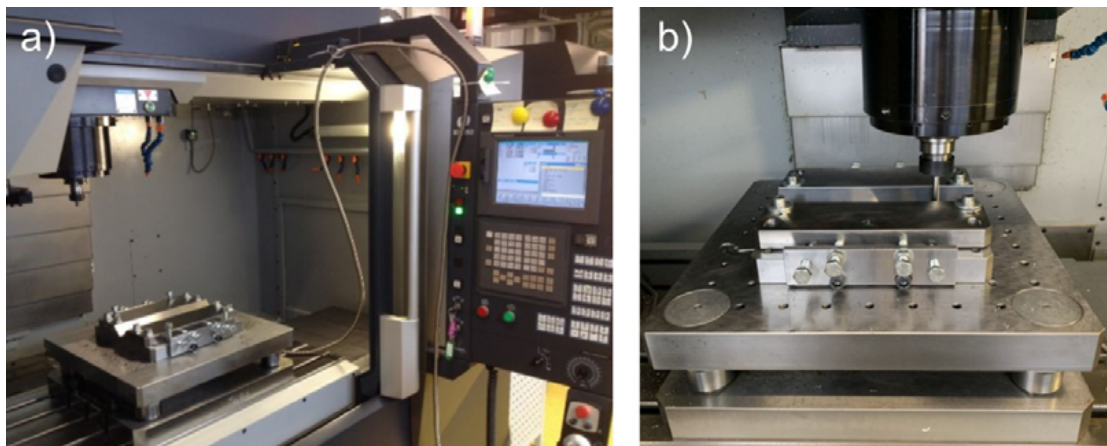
a) General view of 3-axis CNC machine (Makino PS 95) adopted for FSW process, b) View of mounting device used in FSW process installed on dynamometer plate
